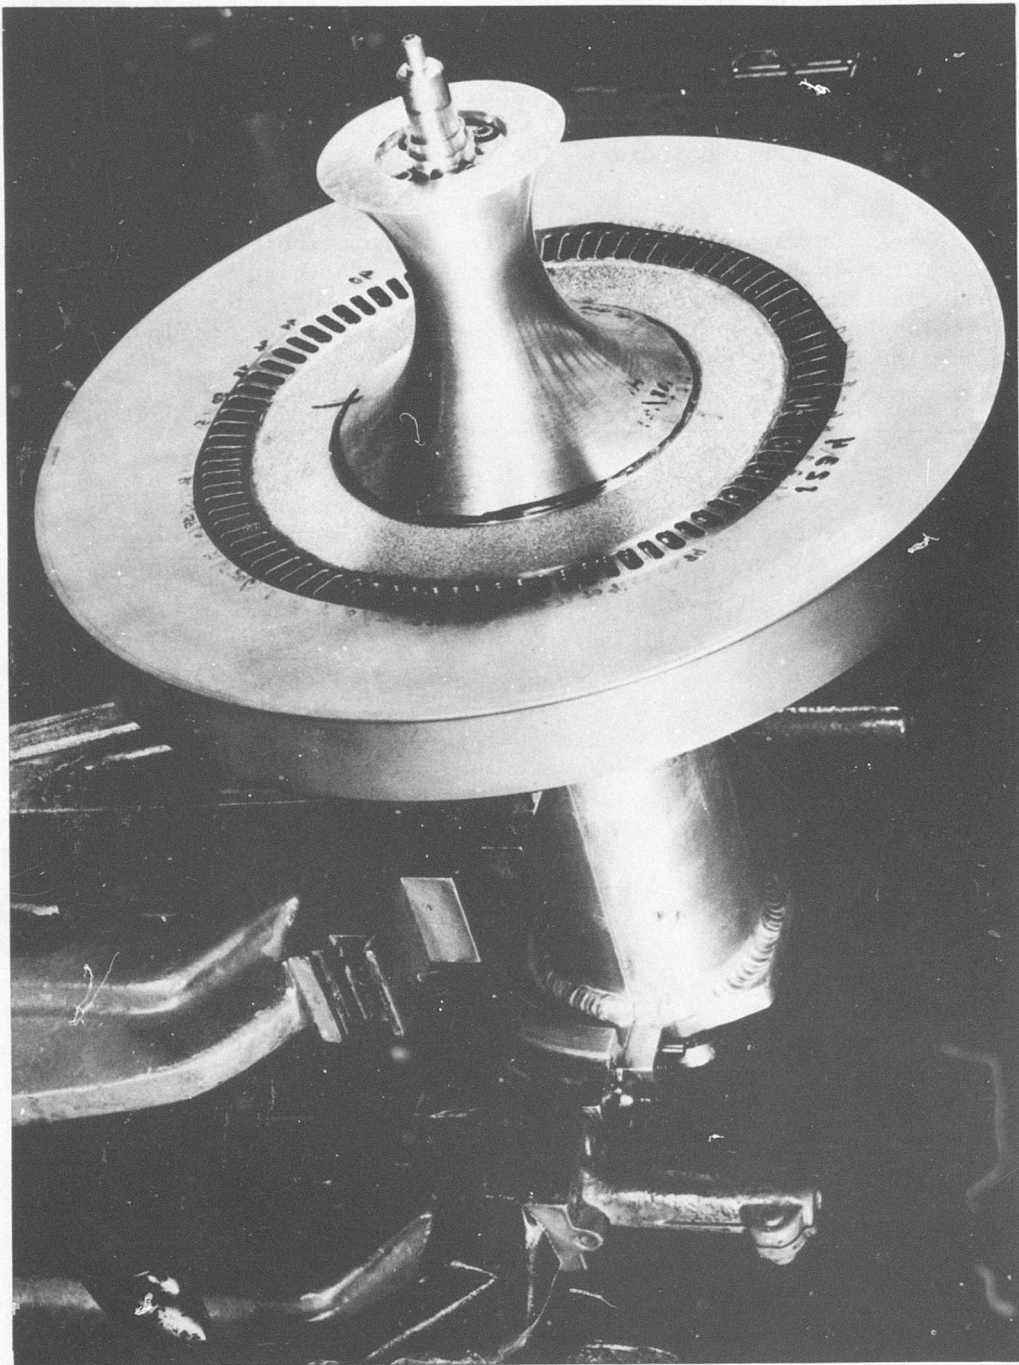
Assembly of Rotor Disc and Rotating Centerbody Mounted on the Balancing Machine.
